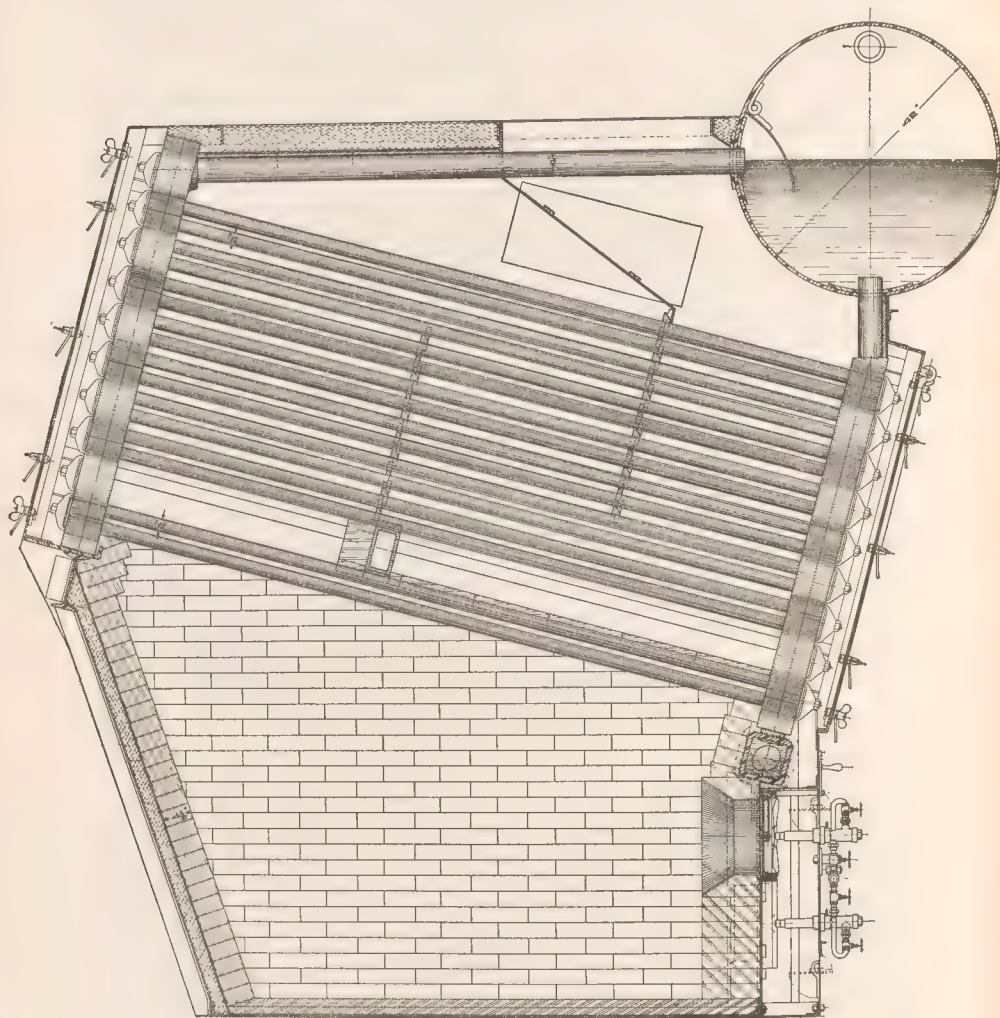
Furnace of Babcock & Wilcox Marine Boiler.
